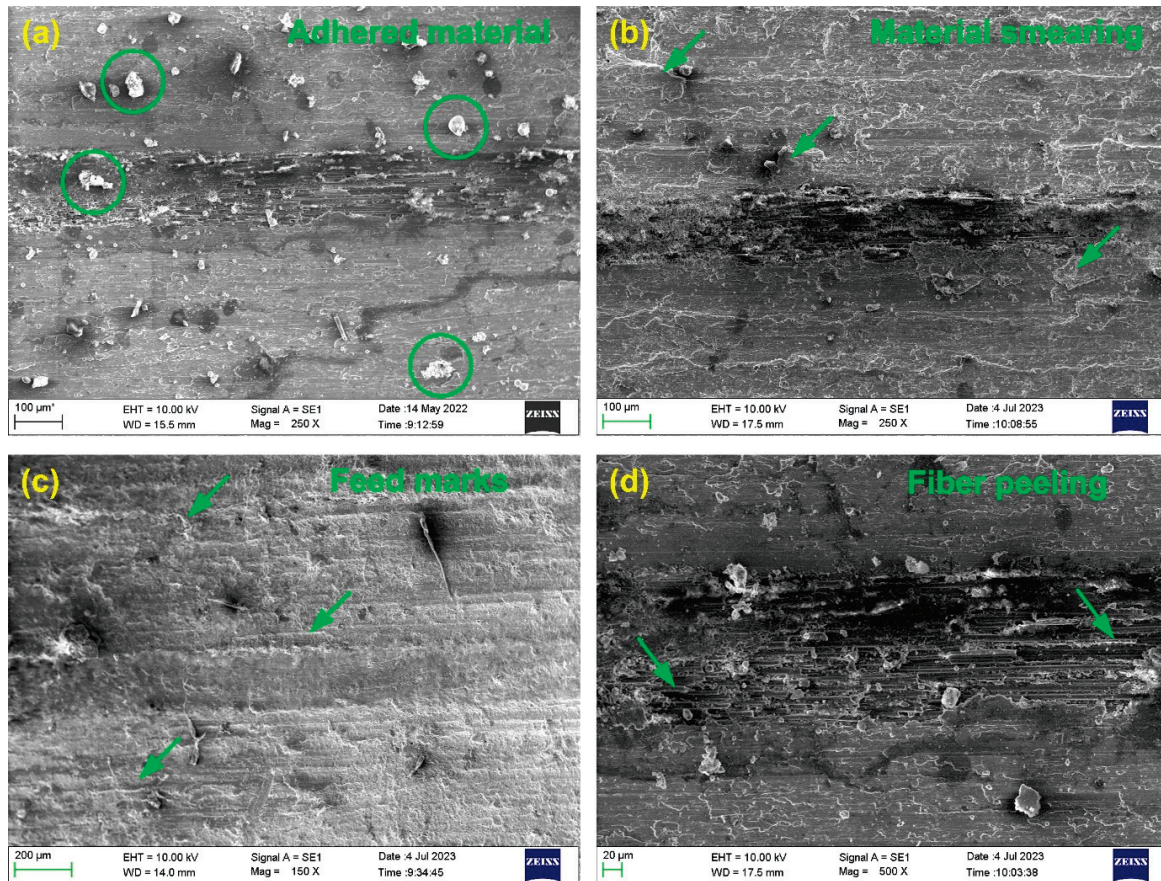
Surface damages in the form of (a) material adhesion, (b) material smearing, (c) feed marks, and (d) fiber peeling were observed in the helical milled holes.
